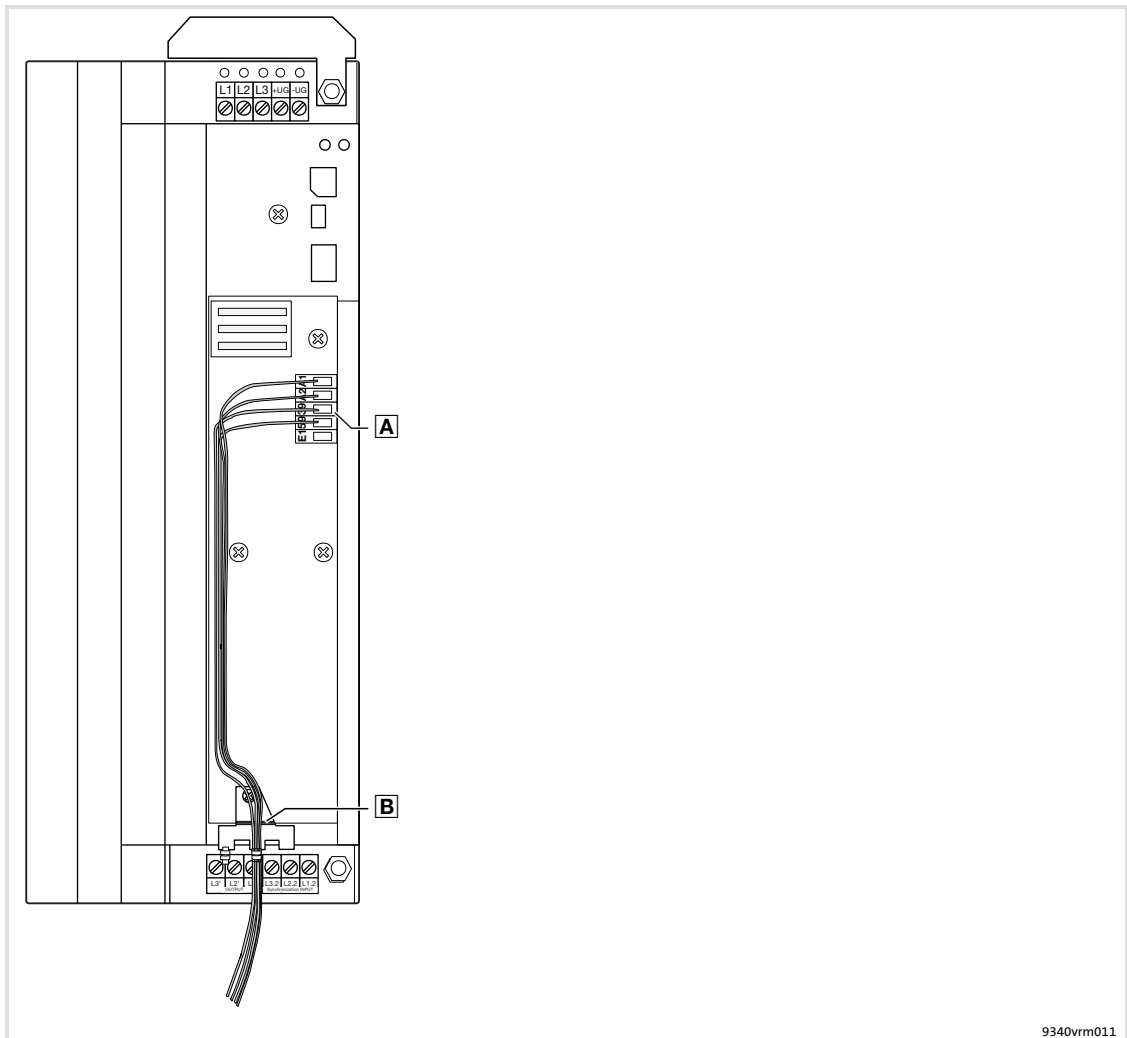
Wiring of the control connections EMB9341 and EMB9342
